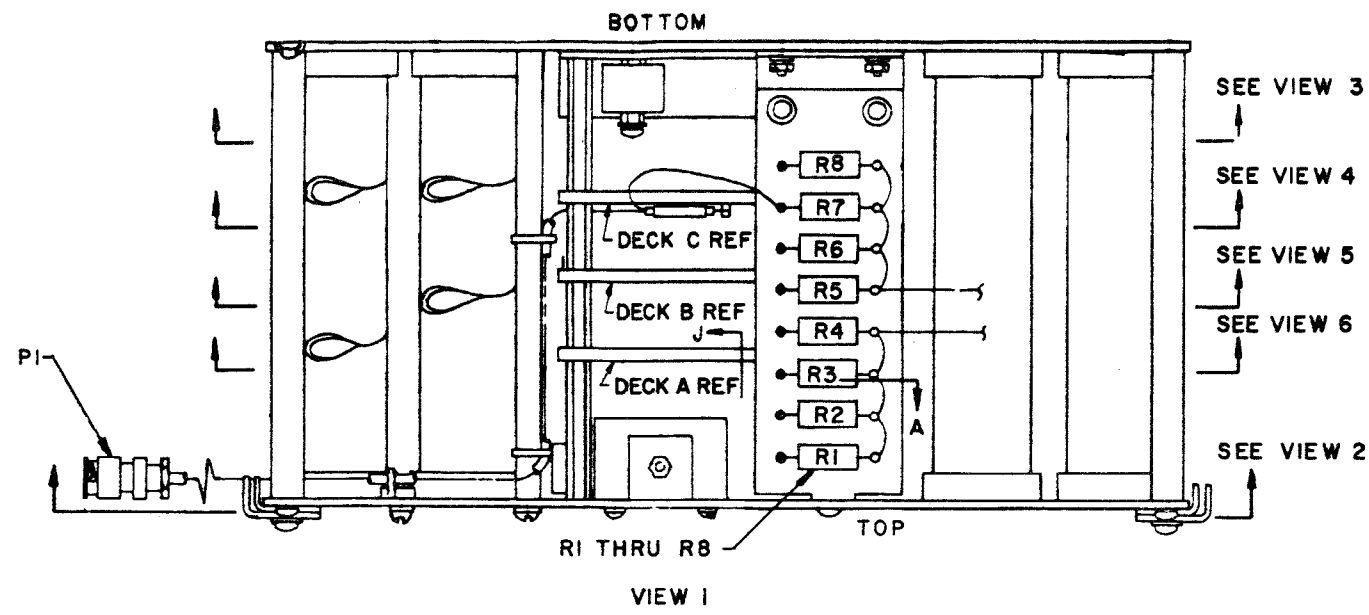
Final Transformer Assembly 1A1A2, Component and Test Point Locations
